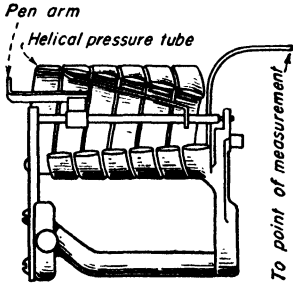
Winding the tube in the form of a helix also offers the advantage of greater pen deflection.
